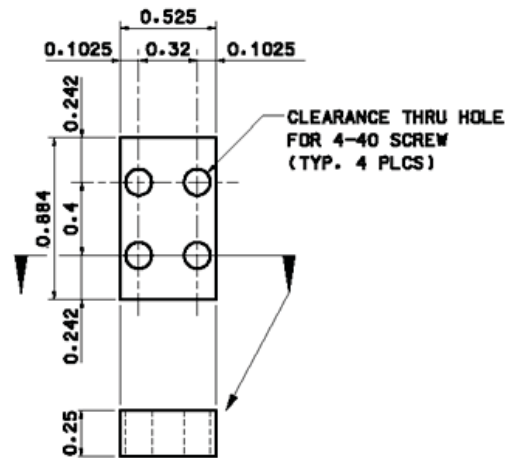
Drawing of upper block for 10-specimen fixture (all dimensions shown in inches).
